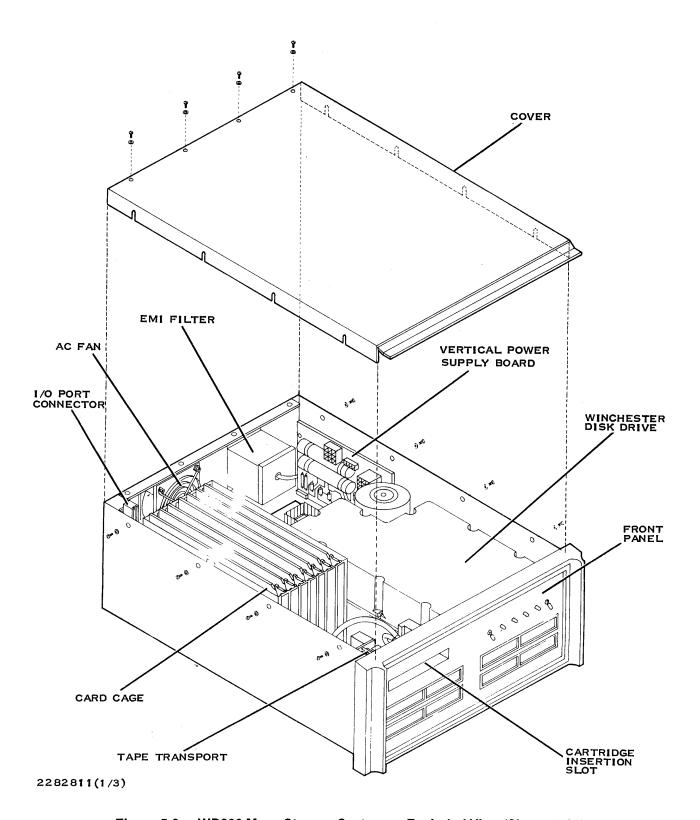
WD800 Mass Storage System — Exploded View (Sheet 1 of 3)
